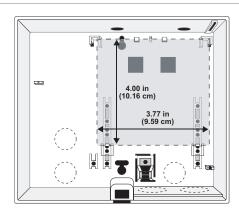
Installation of 3.83 x 4 in. (9.72 x 10.16 cm) circuit board
